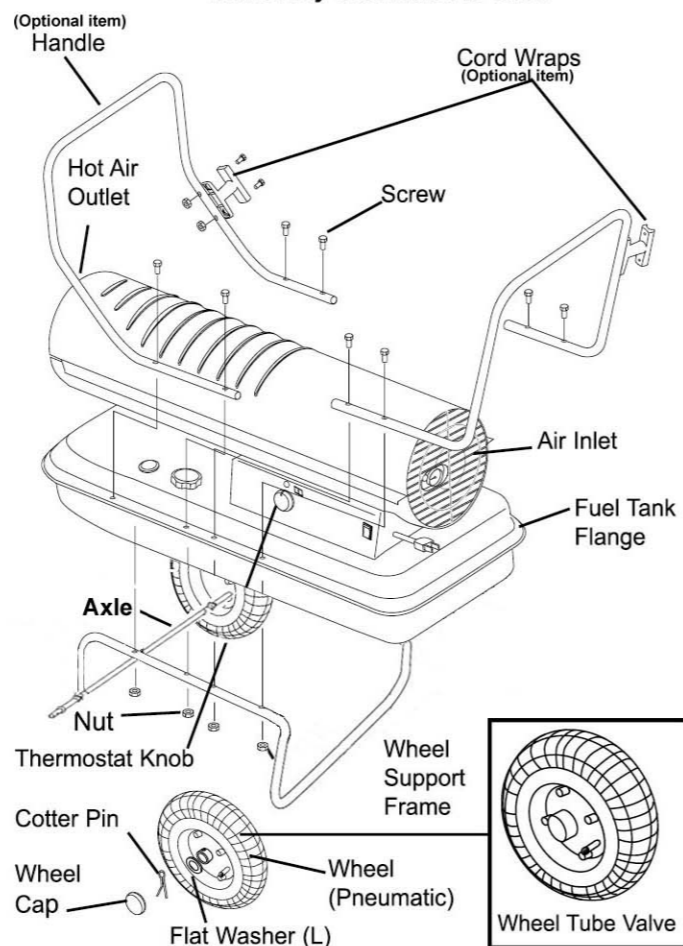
Assembly of Models ZB-K125 / K175 / K215
